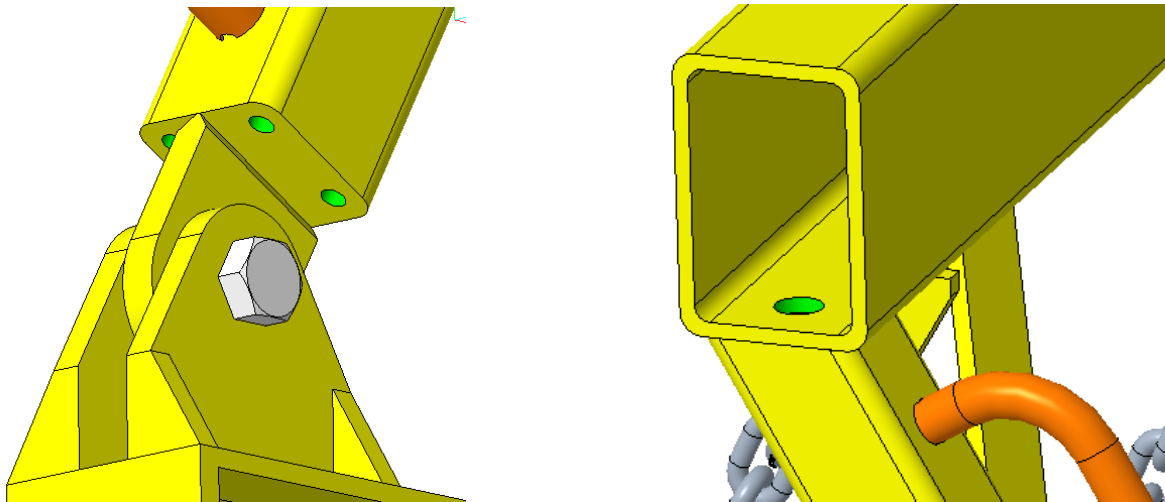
Drainage holes of end sections of A-frame, highlighted in green.
